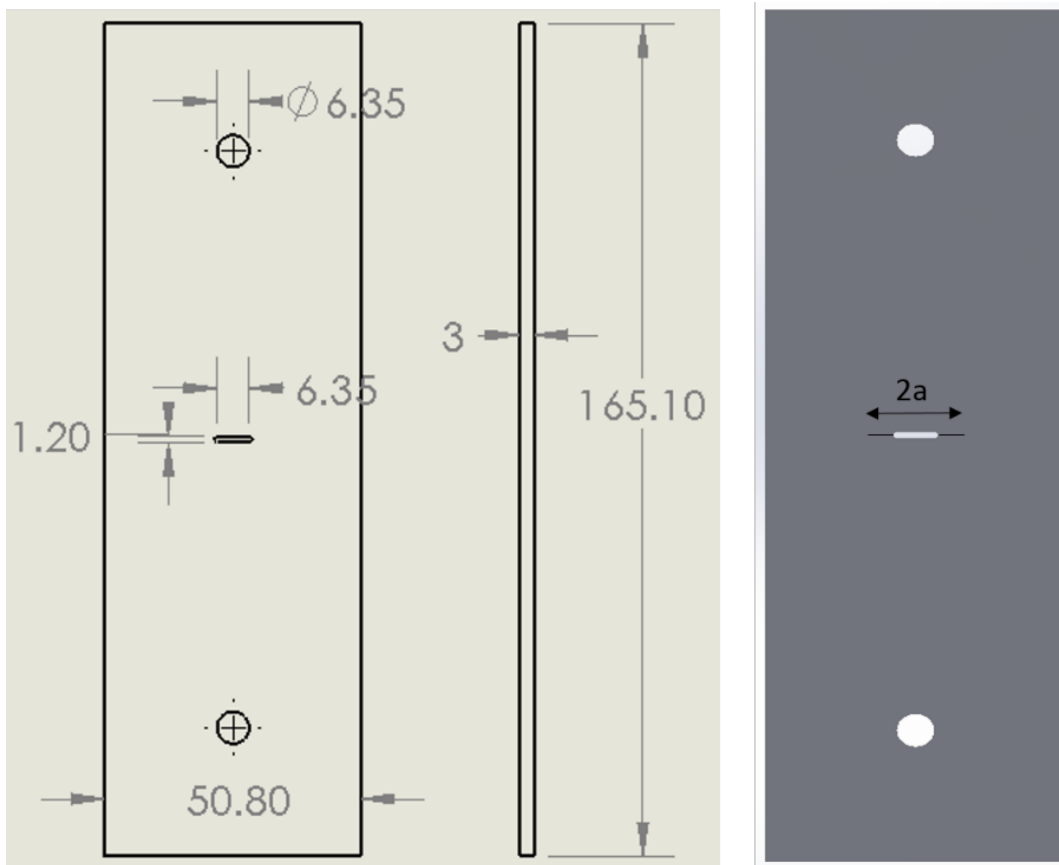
Dimension specification of center crack tensile specimens in units mm
